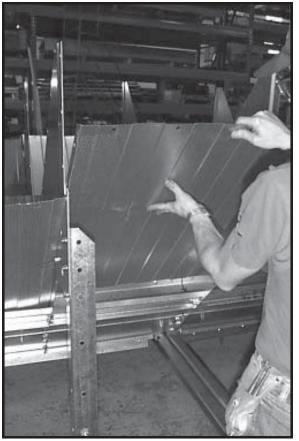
Sliding plenum bottom between hopper bulkheads and over connector sheet.
